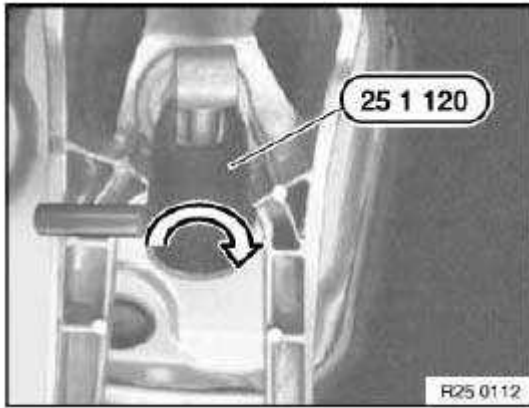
Inserting Special Tool And Turning Counterclockwise
